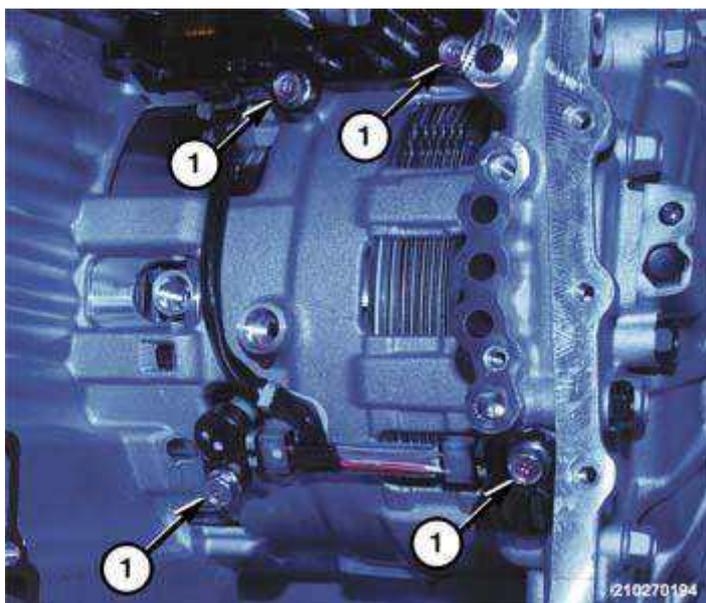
Speed Sensors, Main Wire Harness & Bolts
